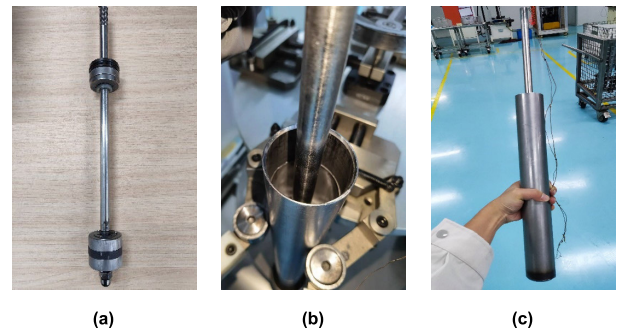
Assembly of MR damper components (a) Installation of internal components, (b) Installation of snap rings, and (c) Damper assembly.
